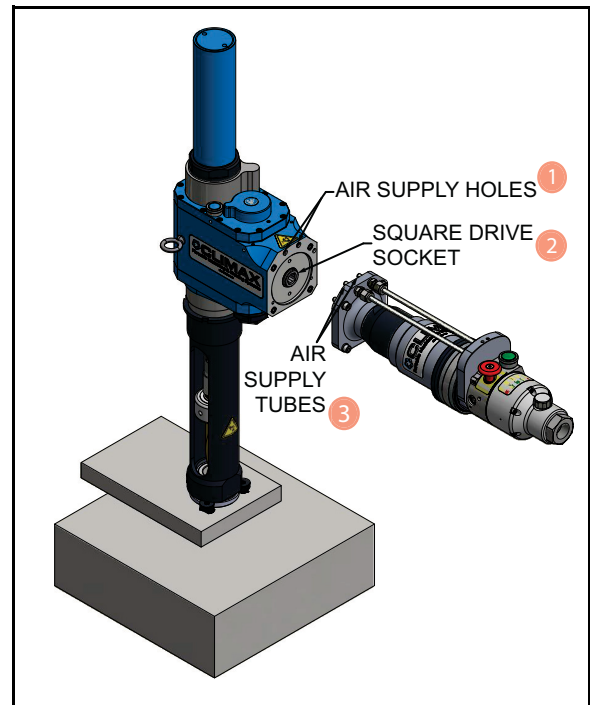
INSTALLING THE AIR MOTOR TO THE GEARBOX
